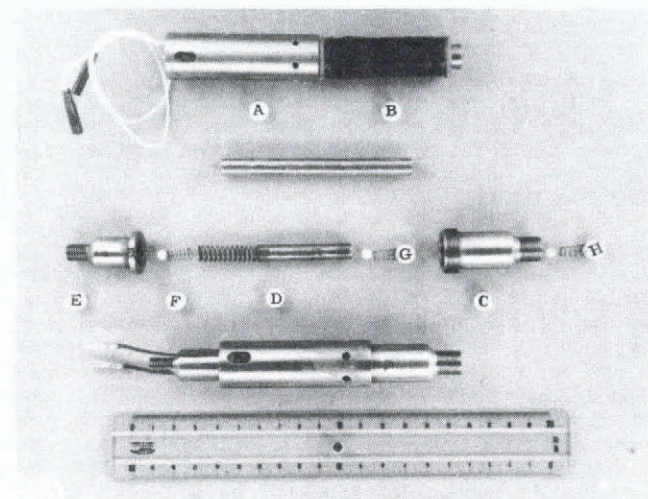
Electromagnetic pump. A. Magnetic circuit; B. Coil; C. Priming cage; D. Piston forming magnetic core; E. Suction cage; F. Bottom valve; G. Priming valve; H. Delivery valve.
